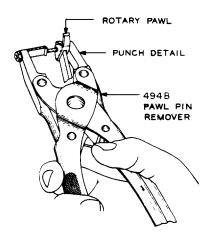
Method of Removing a Rotary Pawl Pin From a Rotary Pawl
